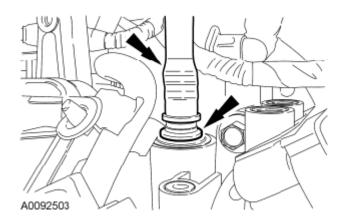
Locating Quick Release Locking Ring Courtesy of FORD MOTOR CO.
